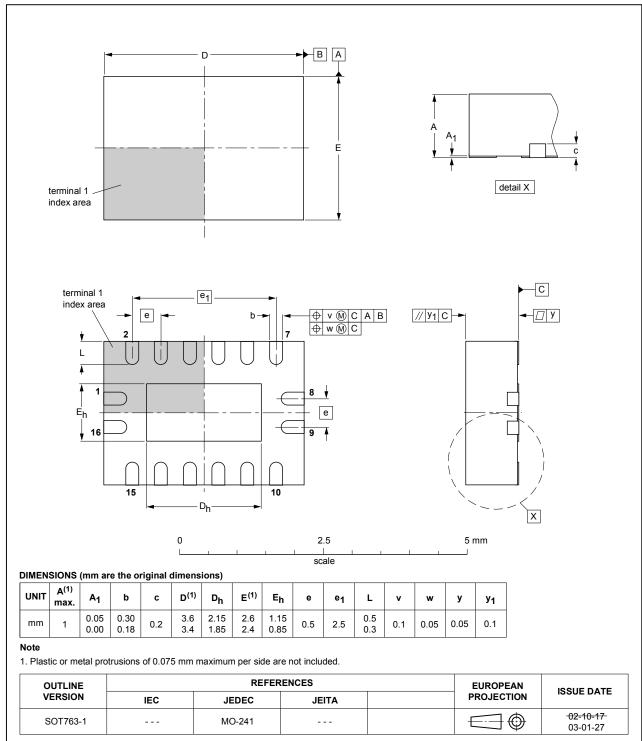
Package outline SOT763-1 (DHVQFN16)
